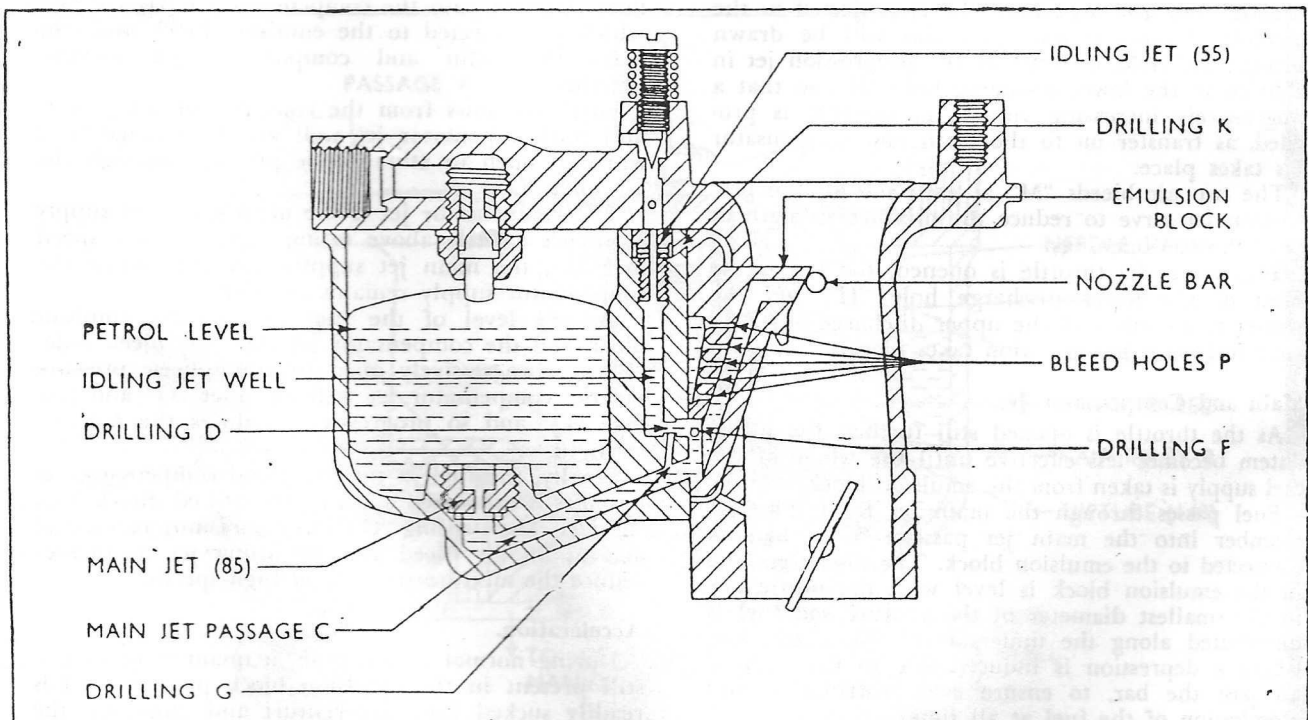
This view of the carburettor shows the venturi and is sectioned through the main jet.
